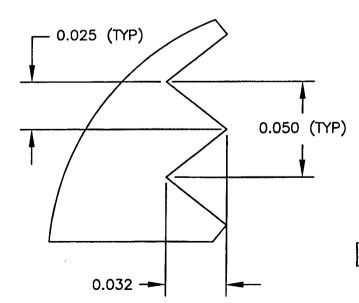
DETAIL B: RIDGE DETAIL PARTIAL SECTION SCALE 1:20
